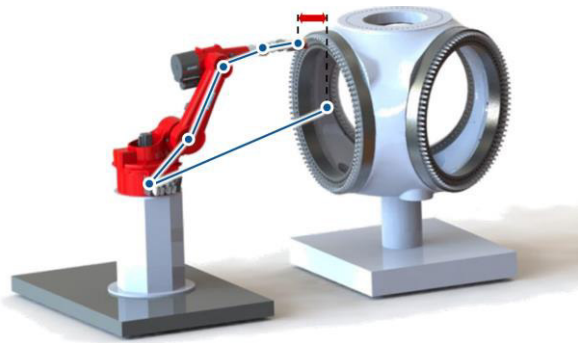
Robot guided bolt tensioning tool (Müller et al., 2014)
